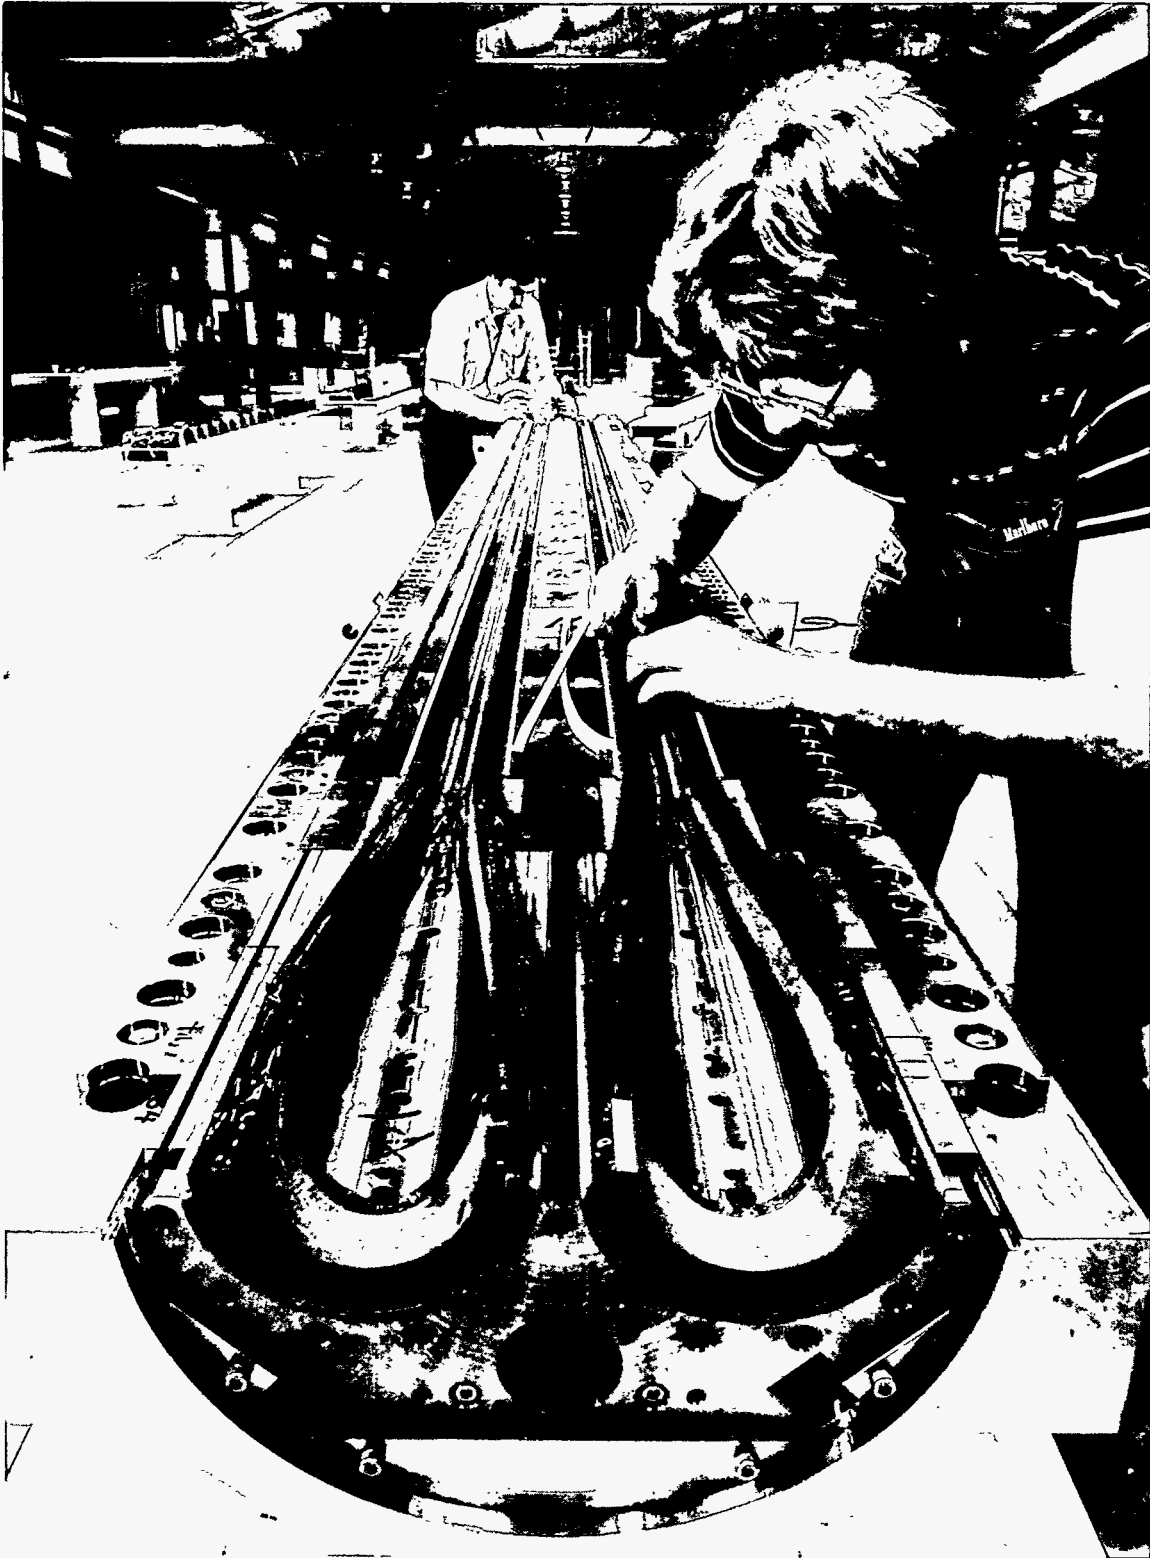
Lower half of two-in-one high field magnet during assembly.
